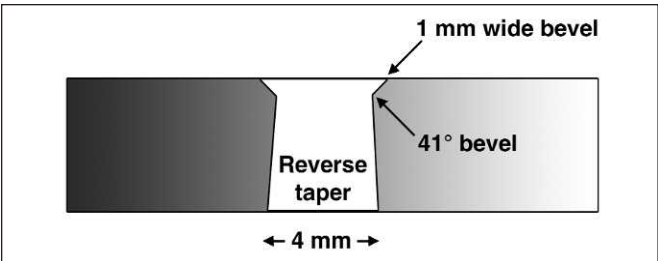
A cross-section of the stainless steel sample mold and testing fixture. The reverse taper was placed to minimize friction between the sample and the mold, as the sample was loaded from the beveled end.
